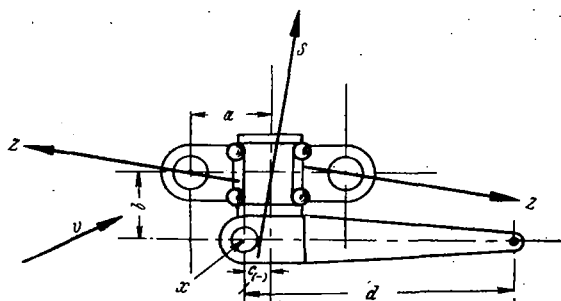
Schematic drawing of rotor blade hub with elevator control.
